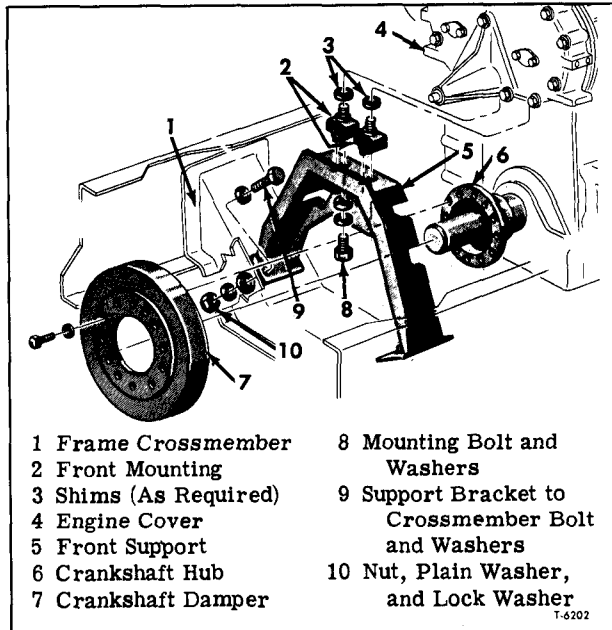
Engine Front Mounting on DI, FI90 (Vehicles without Air Conditioning)
